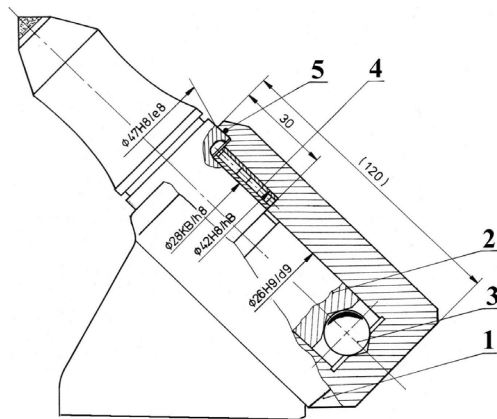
Bearing of the tangential rotary tools with the supportive bearing globule in the holder (Bęben *et al.* 1999)
